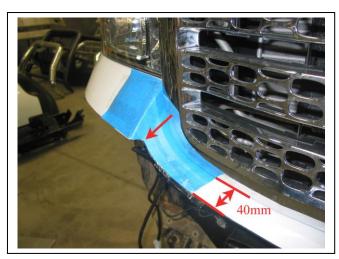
Placement of grille section of template. Cut inner corner no smaller than the size of a 20 cent piece.
